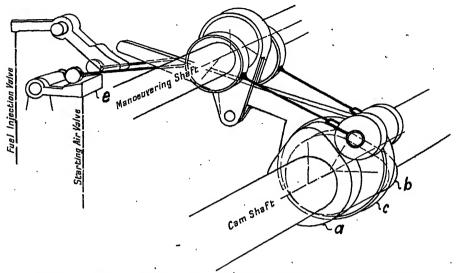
Diagram of Valve Gear for Fuel Injection and Starting Air Valves (Tosi).
